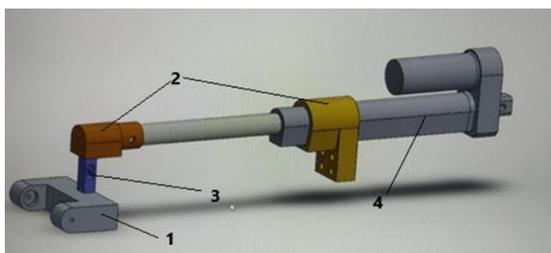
Fixtures components connected to the linear motor: 1.Specimen Grip, 2.Fixture components, 3.Load cell, and 4.Linear motor
